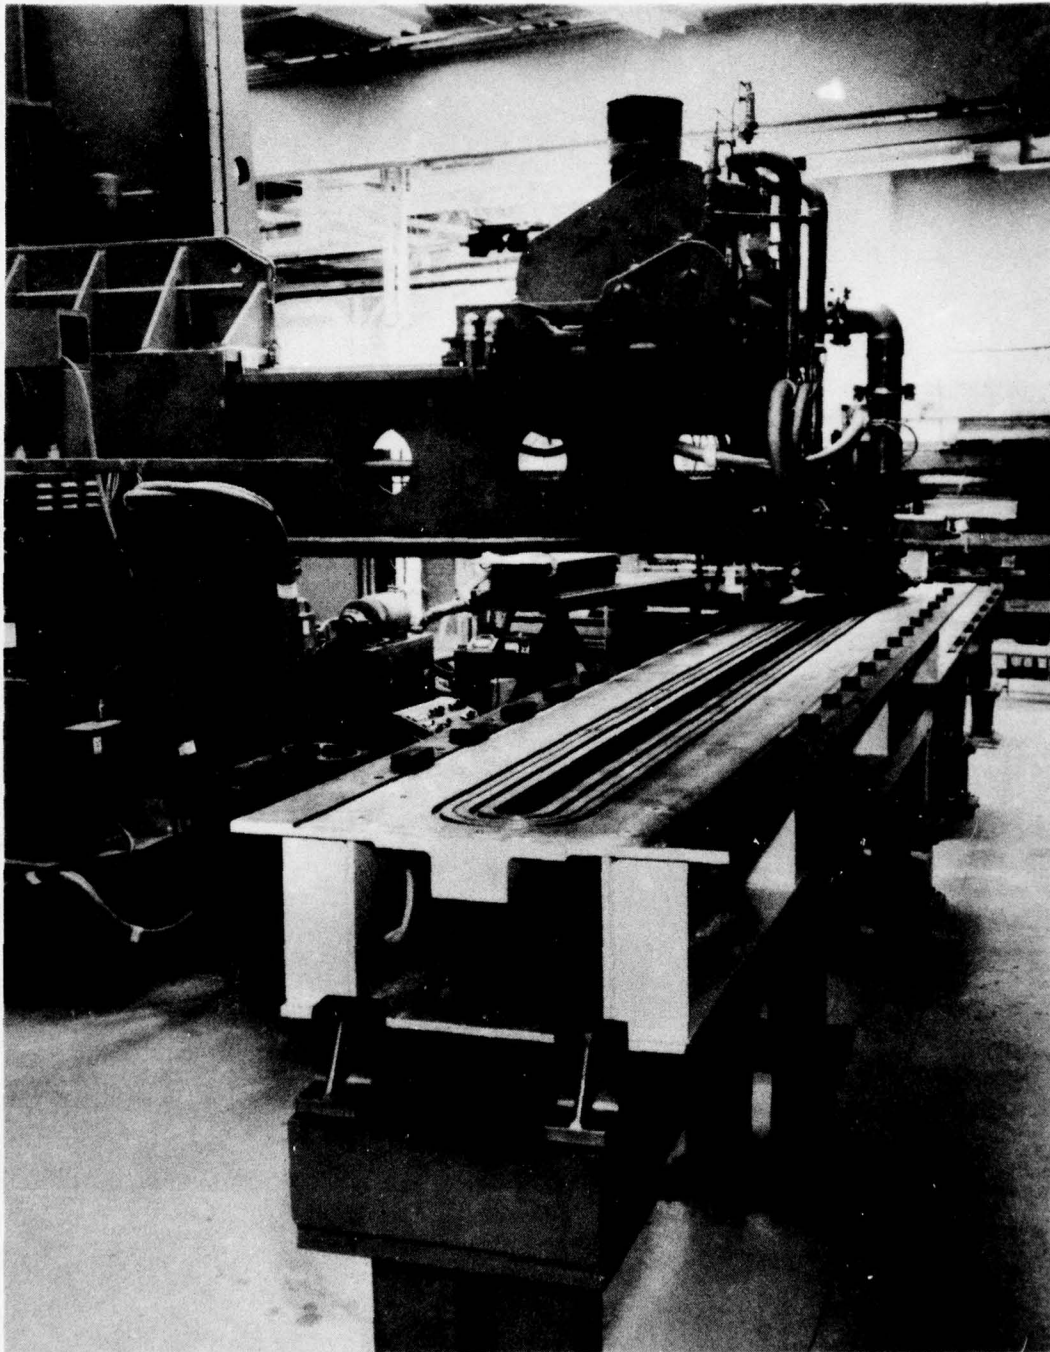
Flat Plate Welding Fixture Mounted on Table Assembly
